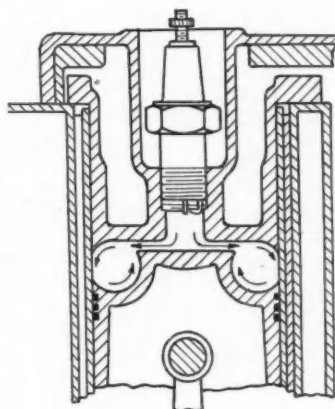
Diagram of Hill combustion chamber as applied to sleeve valve engine
